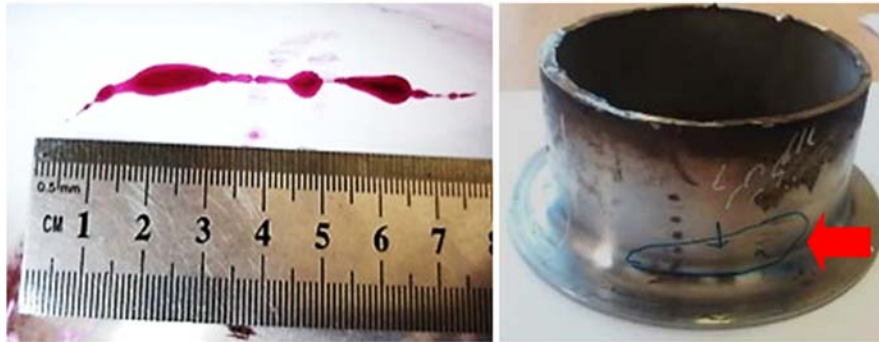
Detected crack in the damaged flange (arrow)
